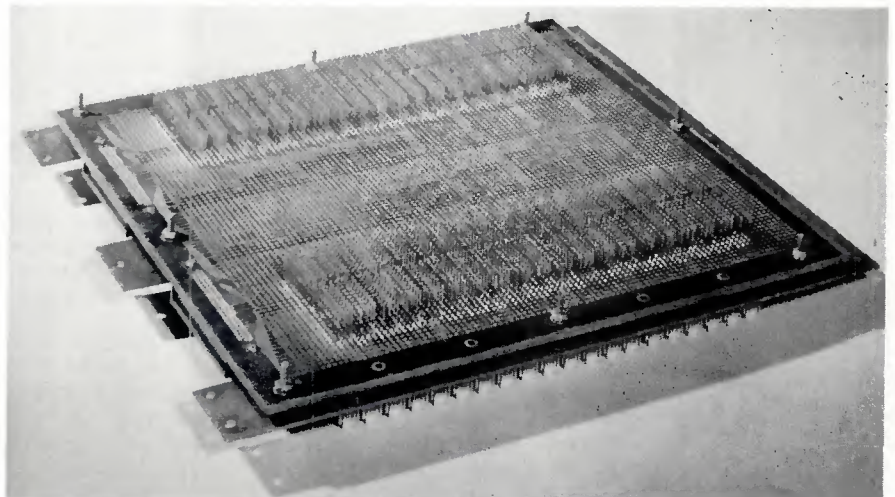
Multilayer printed circuit board solder interconnected to connectors with wire-wrap terminals
